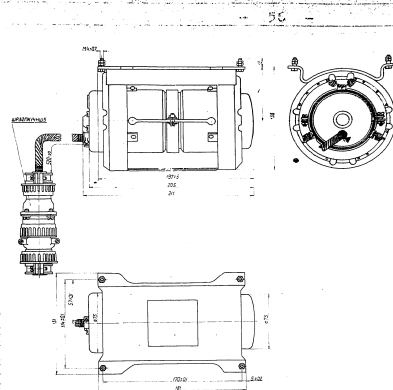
Overall and Installation Dimensions of BK-53PE Erecting Cut-Out Switch
